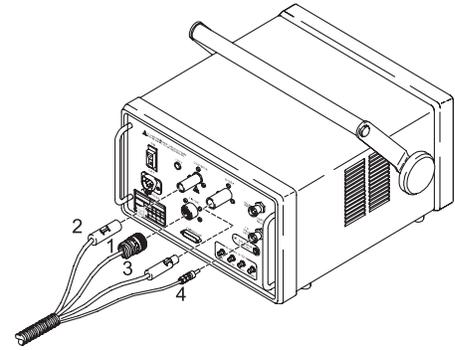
Connecting the Weld Head Extension Cable to the Power Supply
